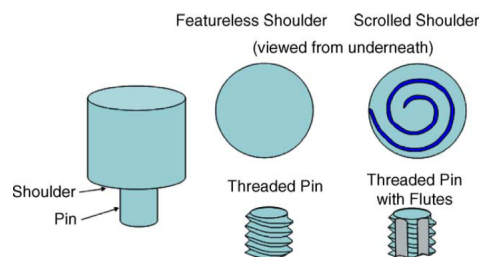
Schematic drawing of the conventional FSW tool.
